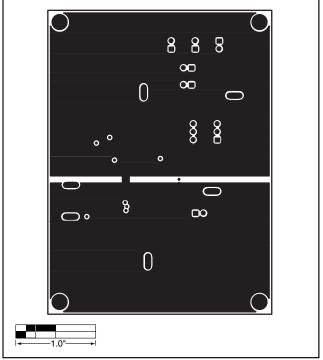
MAX1715 EV Kit PC Board Layout—GND Layer 2
